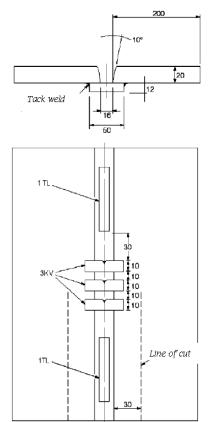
Deposited metal test assemblies when testing "wire–flux" combinations (designations of test assemblies shall comply with Table 4.4.1.4, all dimensioned in mm unless specified otherwise)
